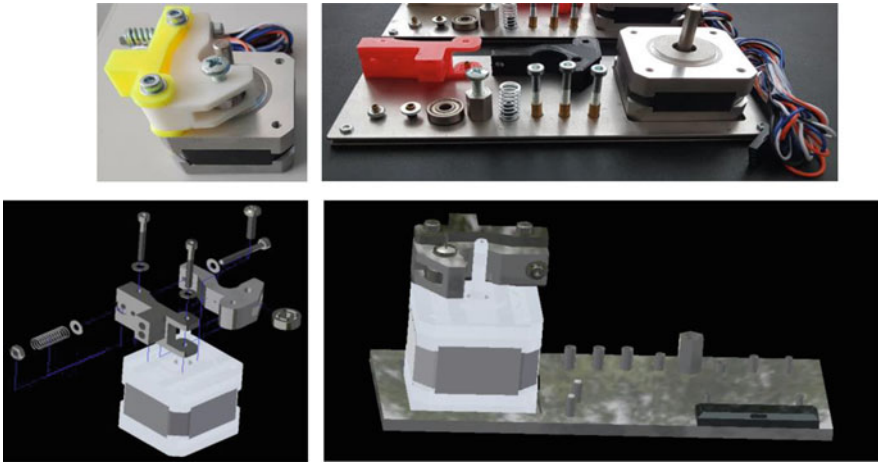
Product and position in fixture (top), 3D model of the product and assembled (bottom)
